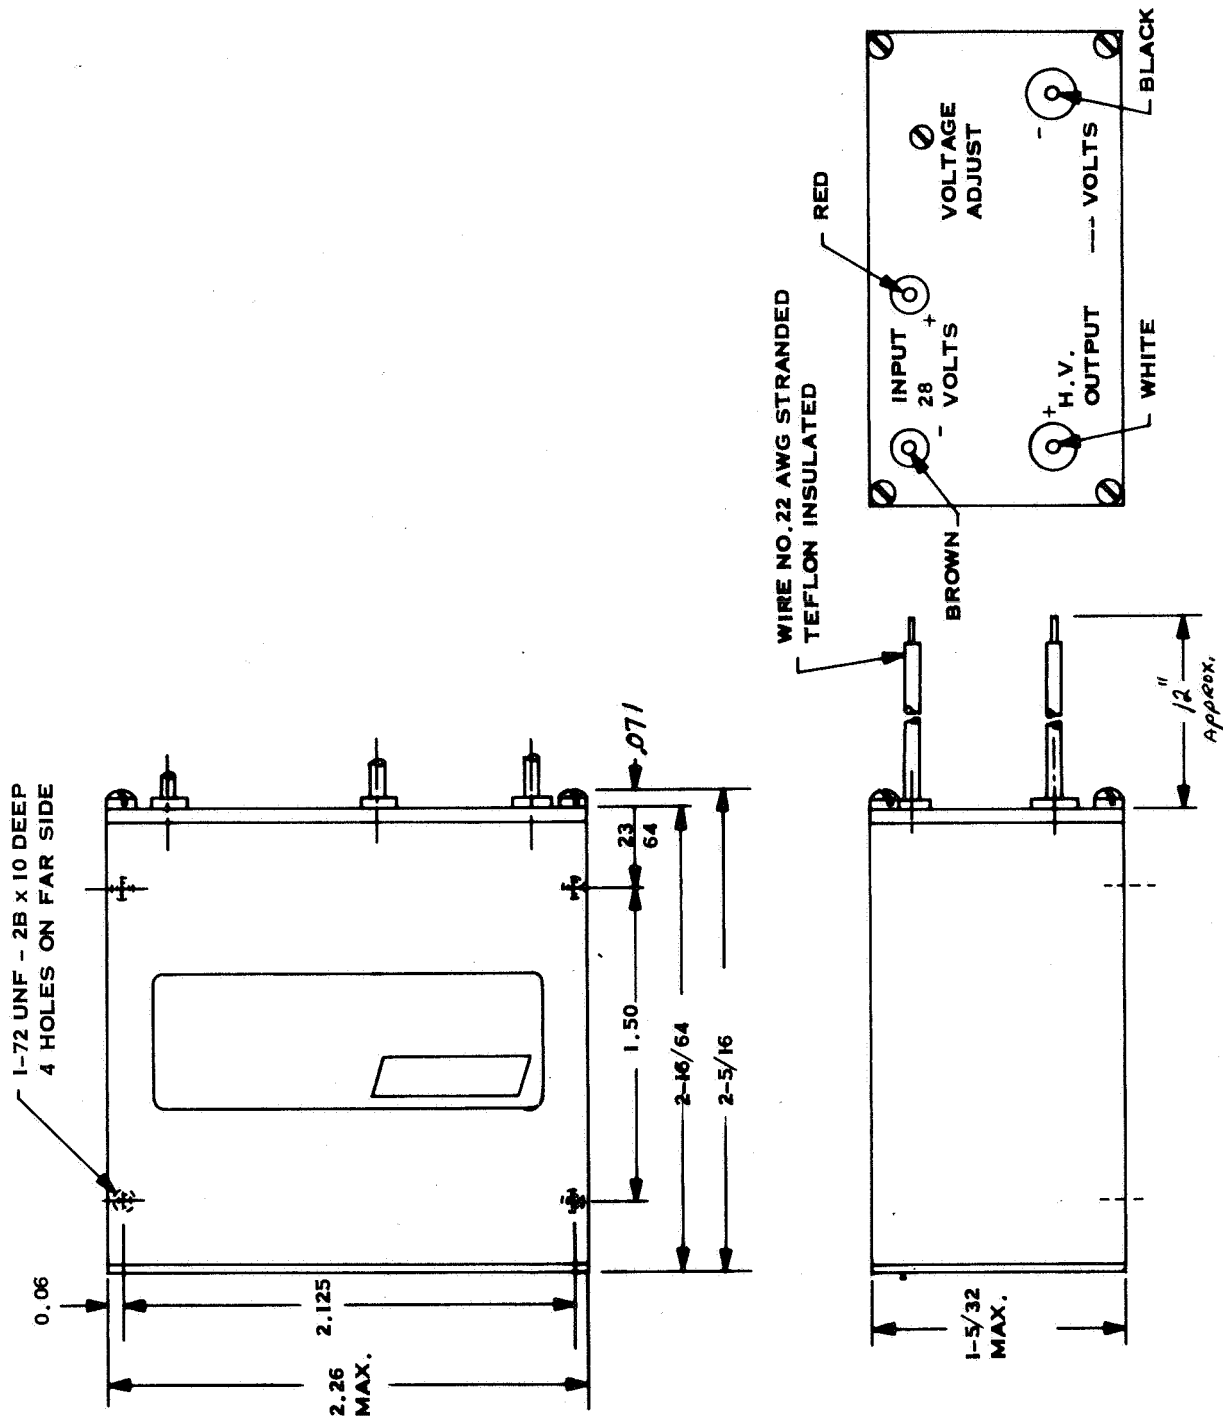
Outline Drawing of EMR Model 1 640C High-Voltage Supply
